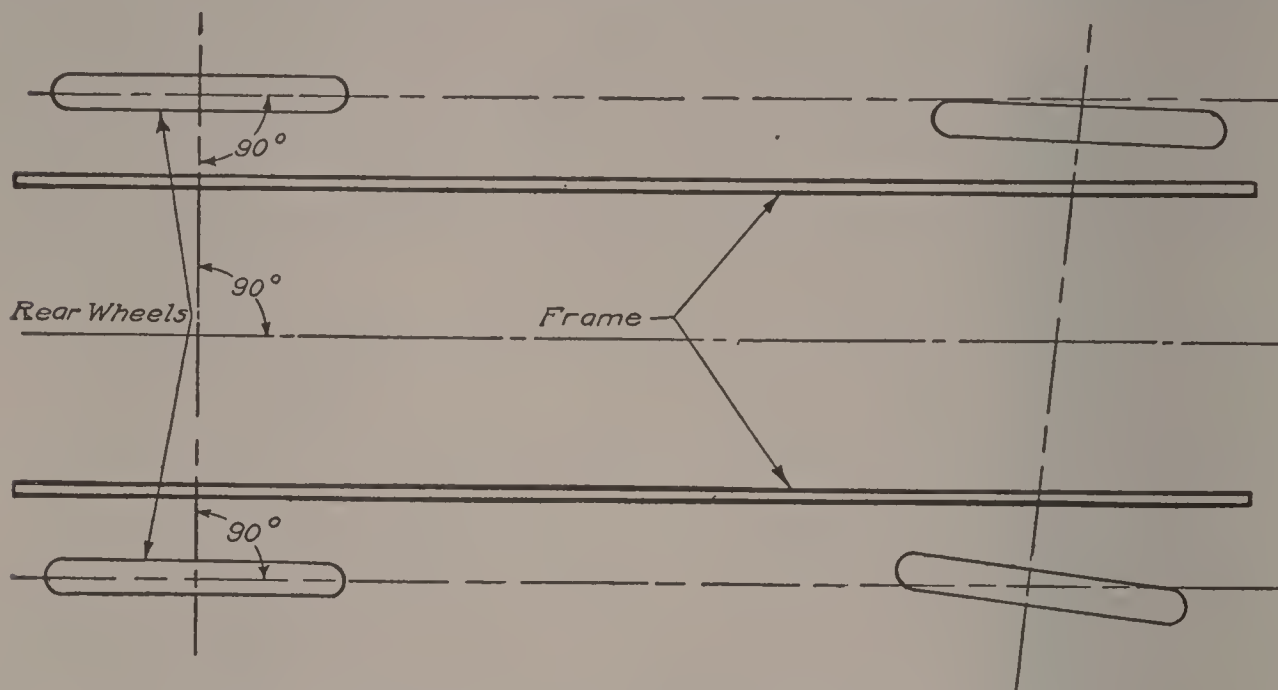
Diagram Showing Front Axle and Wheels Out of True
